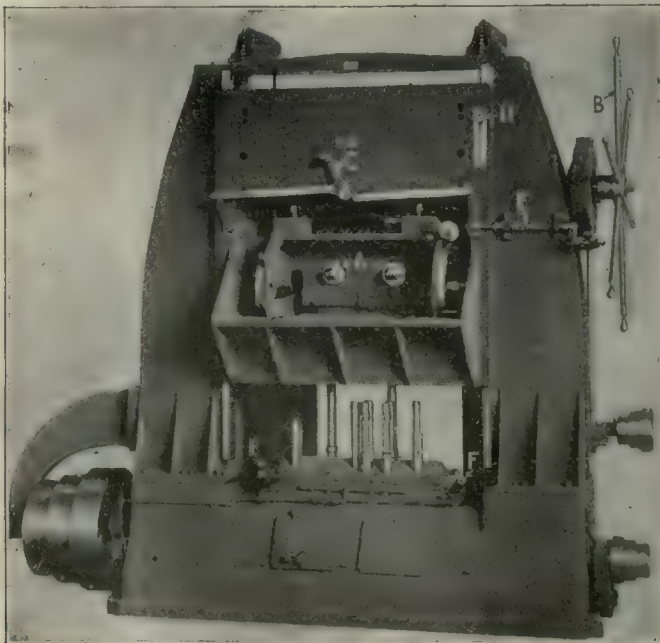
MACHINE FOR DEEP DRILLING IN AN ENGINE BLOCK
